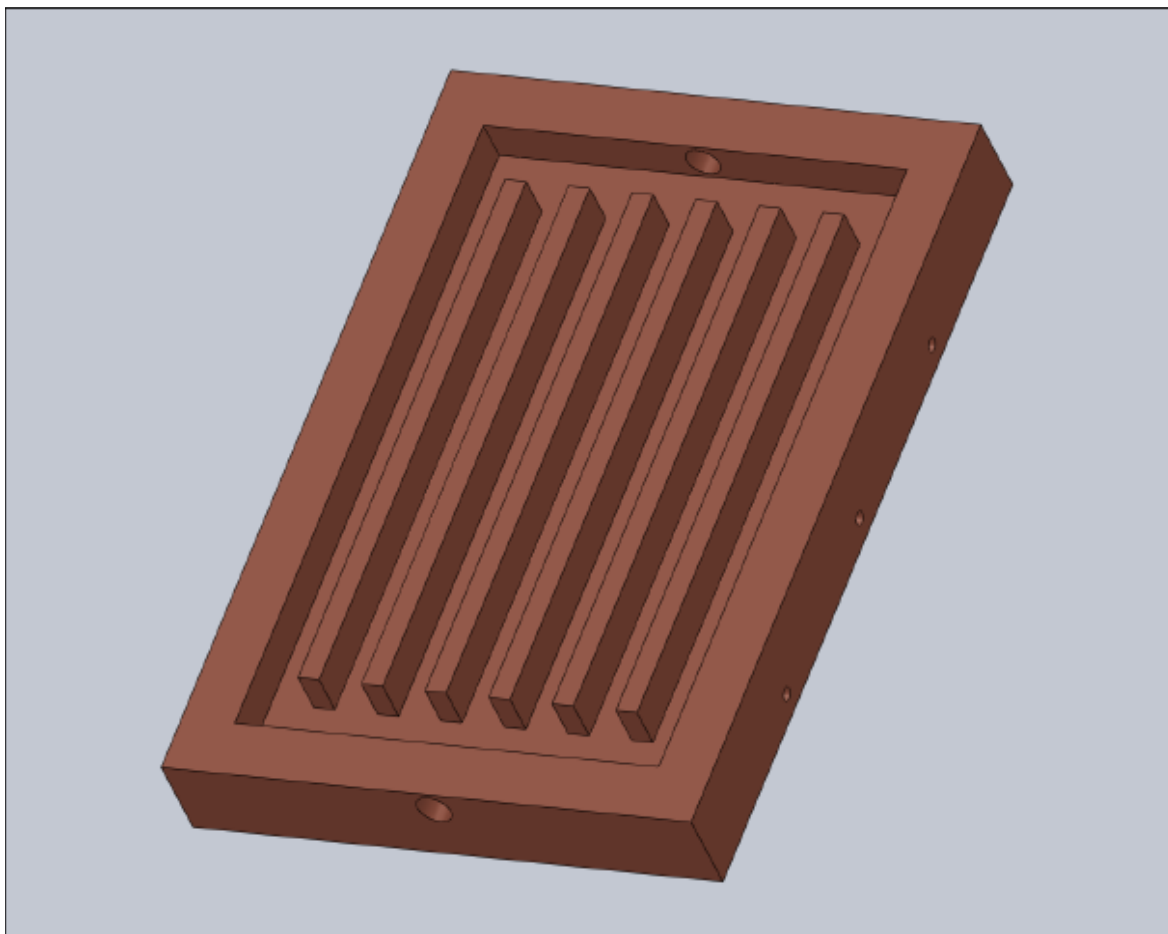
3D- Drawing for the 4mm Minichannel heat sink
